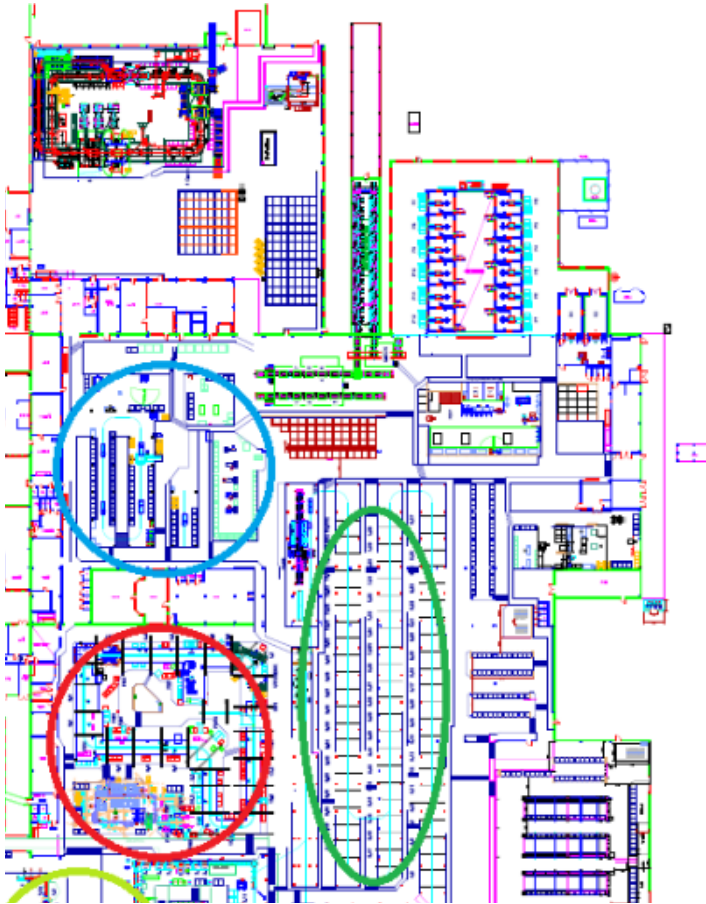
Yellow shows the straight assembly line for the base engine, green is the straight assembly line for the final assembly, red is the V-engine assembly line and blue is the development line.
